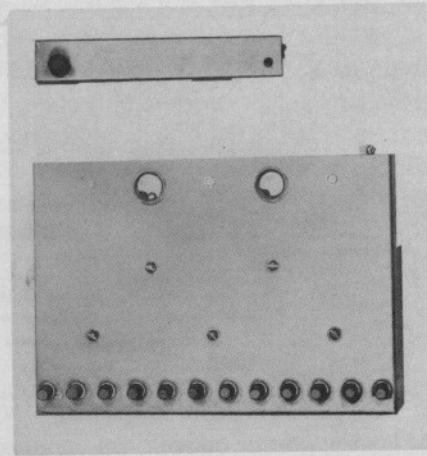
Bottom of the switch assembly and a single switch. Rear of key presses wooden button, which closes switch.
